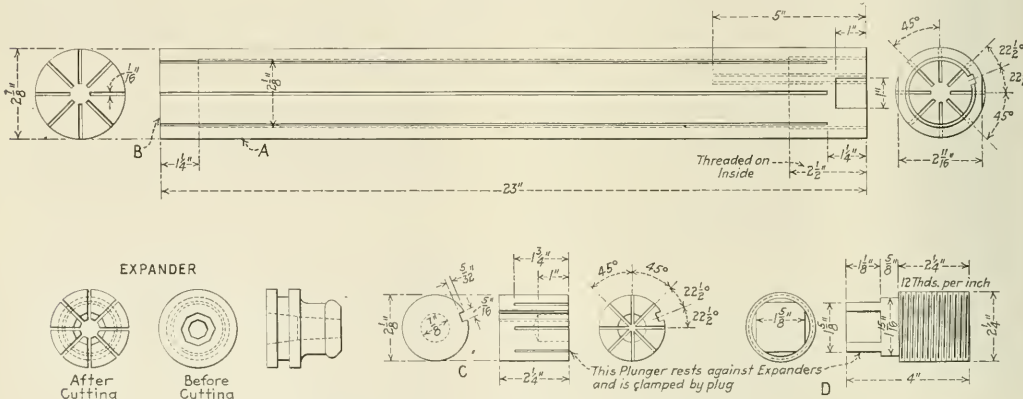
Fixture for Use in Manufacturing Flue Expander Segments
